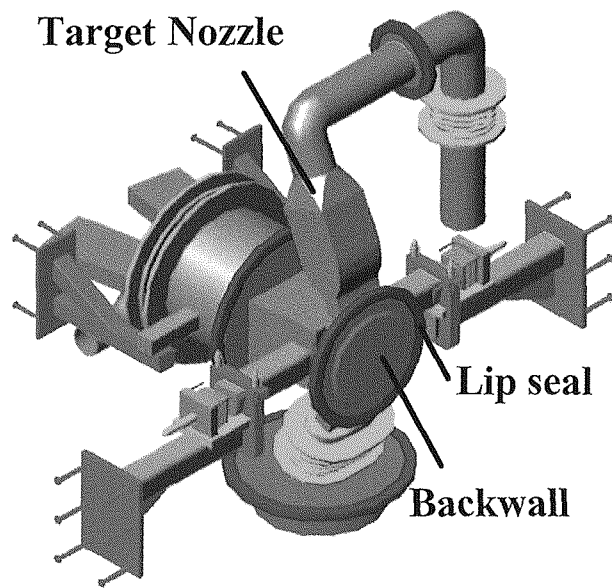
Three Dimensional View of Target Assembly and Back-wall.
